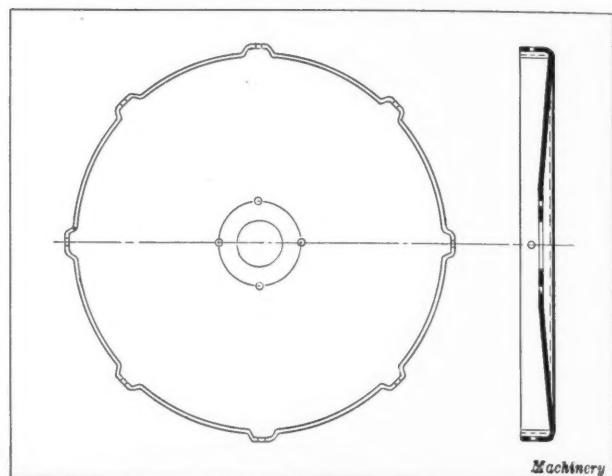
Pressed-steel Head that is blanked and drawn in a Double-action Press
